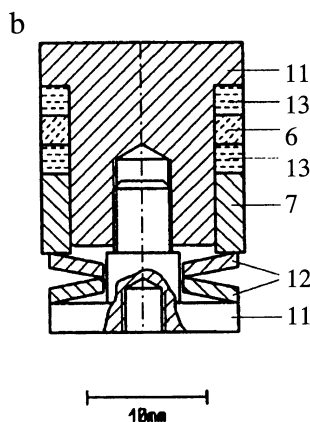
Details of self sealing piston: 6: Indium seal ring ,7: Support ring (TiAl6V4), 11: Body of gliding piston (TiAl6V4), 12: CuBe Belleville springs, 13: Copper support rings.
